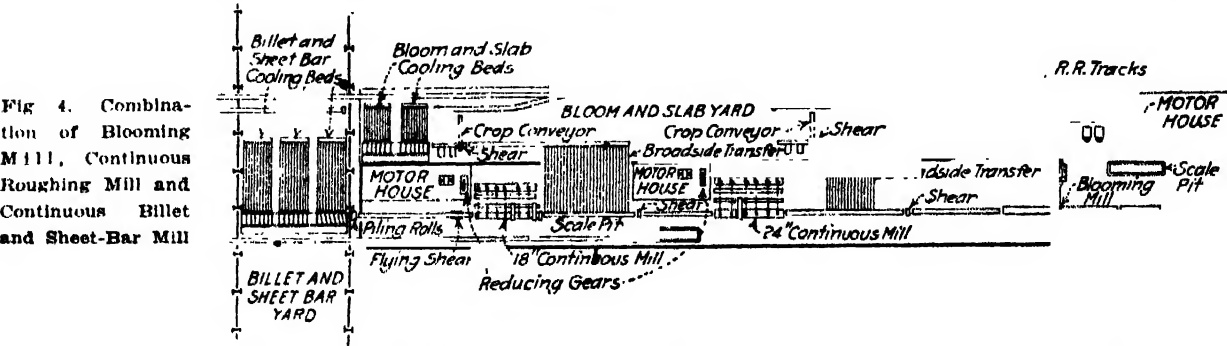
Combination of Blooming Mill, Continuous Roughing Mill and Continuous Billet and Sheet-Bar Mill
